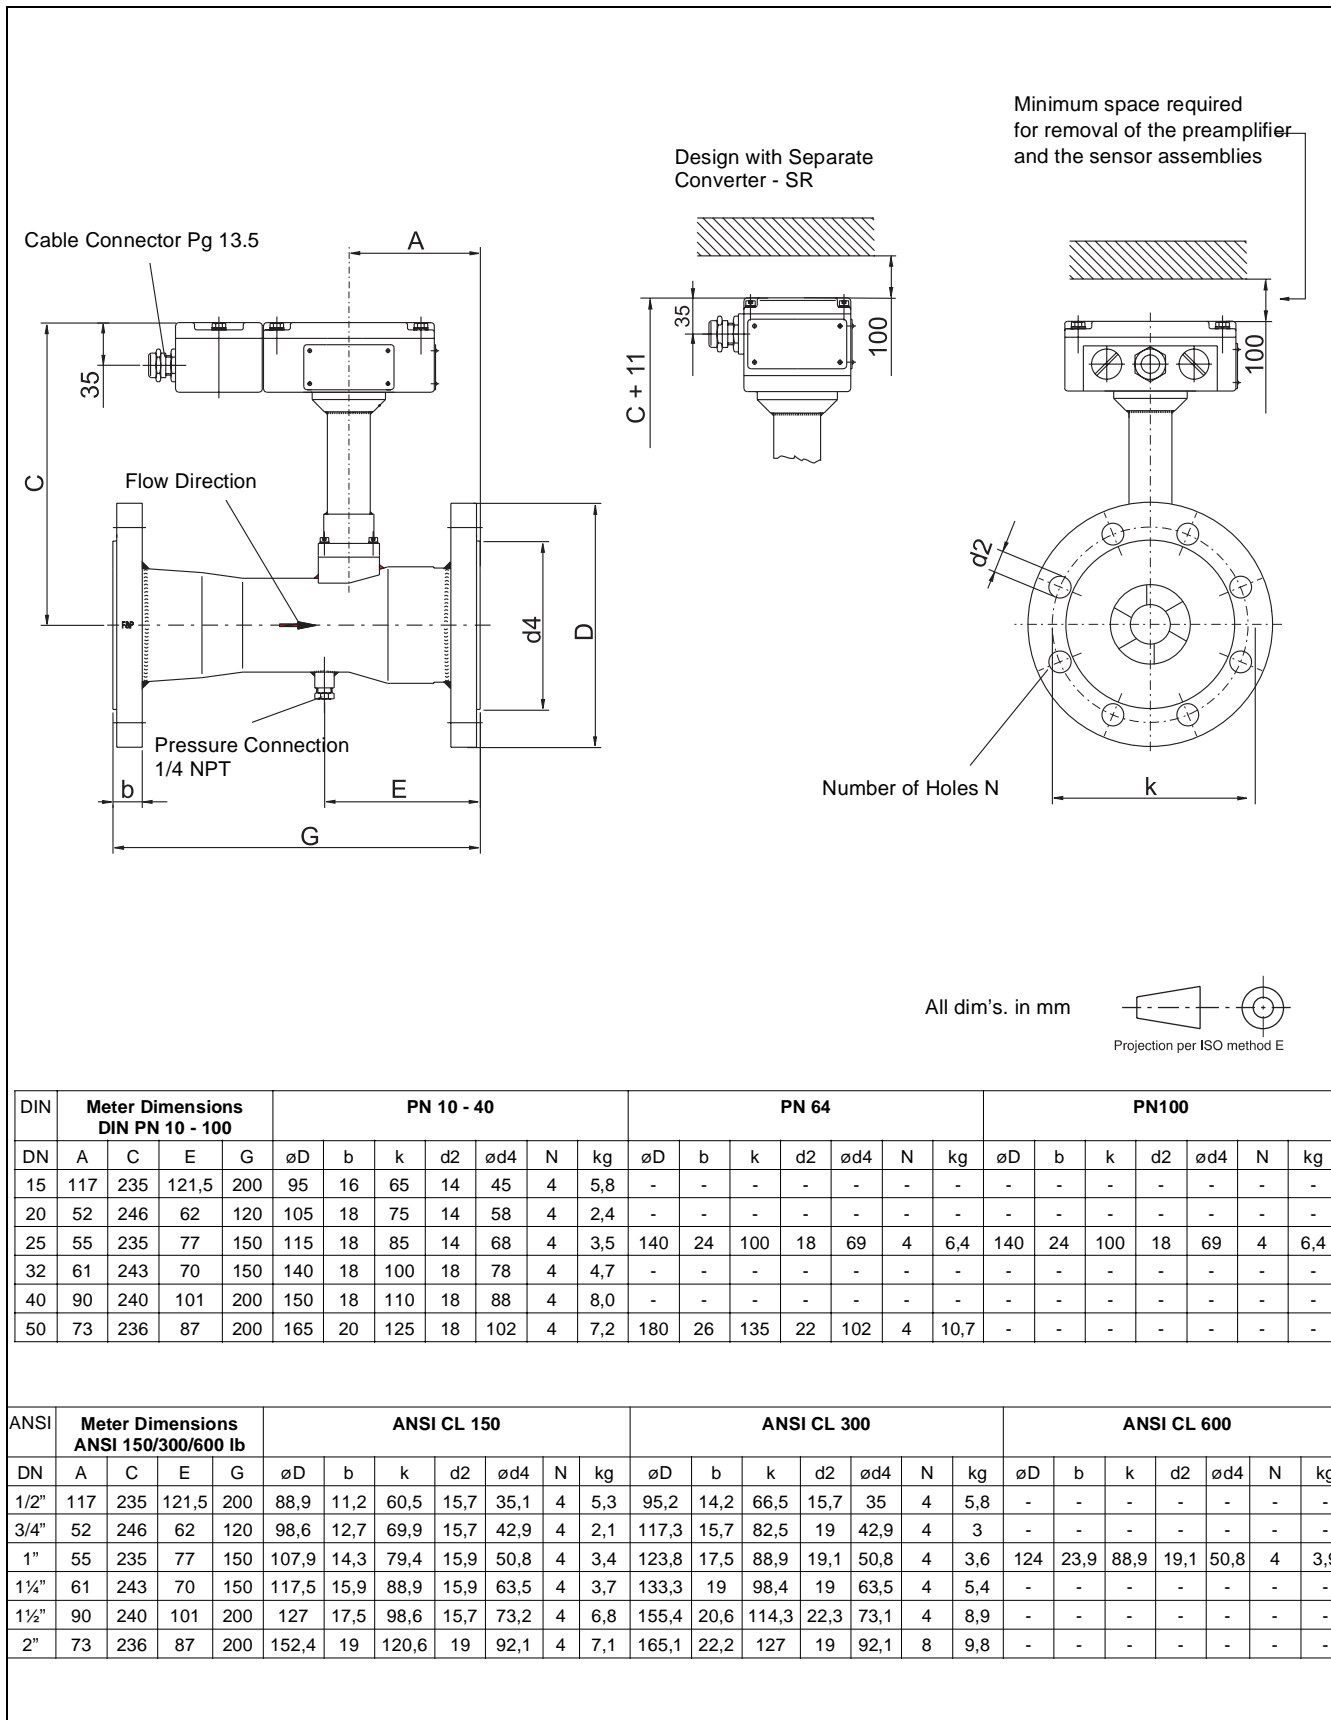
Dimensions, DIN, DN 20 to 50; ANSI, 3/4" to 2"
